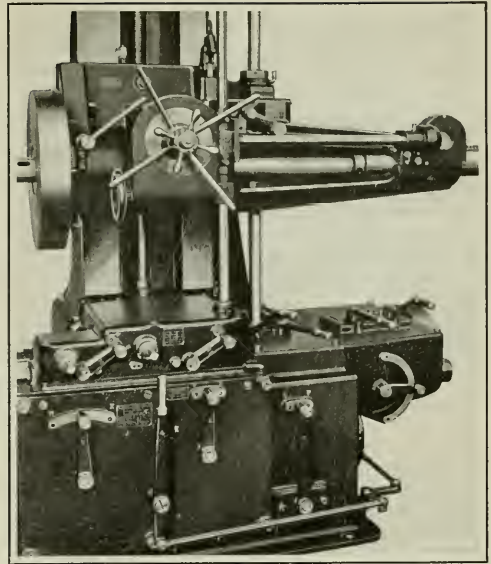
Close-up View showing Centralized Control on the Pawling & Harnischfeger Boring, Drilling, and Milling Machine
